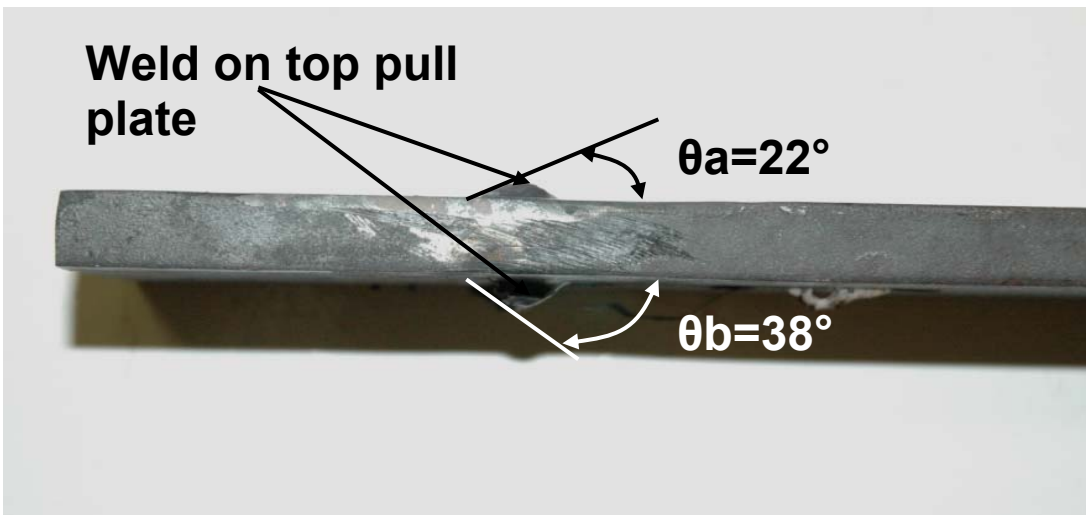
Photograph of a side view Specimen 8, where the profile of the fractured weld on the top pull plate is visible
